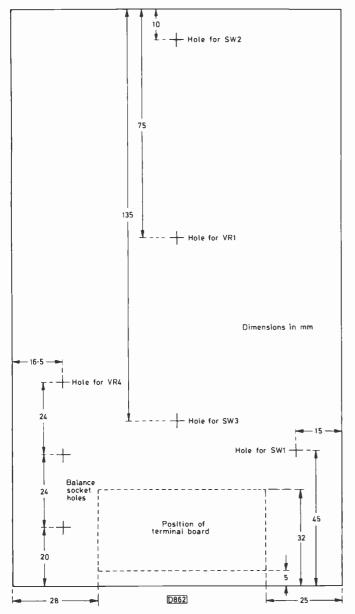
Suggested drilling details for the case top. Hole sizes depend on the components used.
